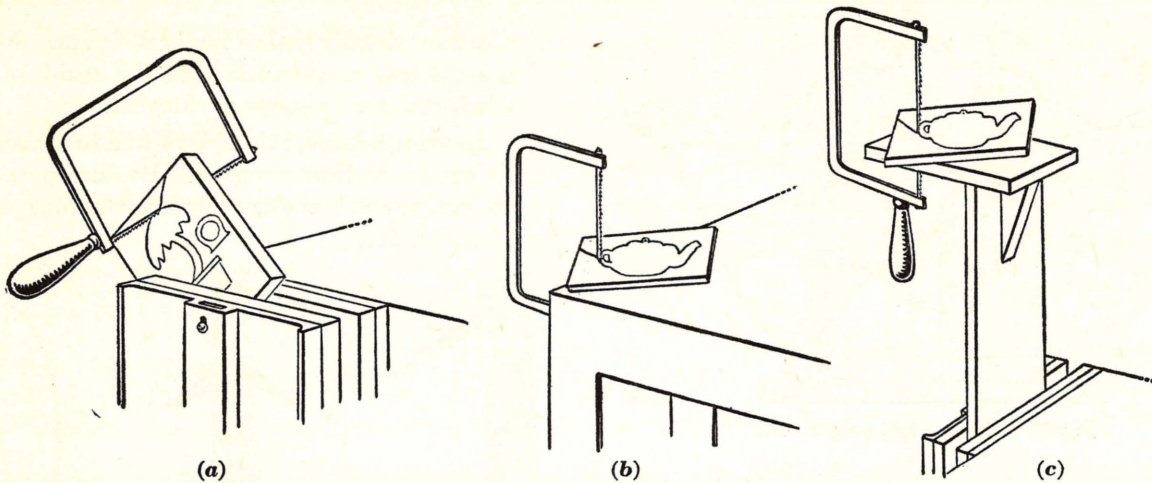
Using a coping saw. (a) In a vise. (b) On the bench top. (c) On a special Vee block holder.
